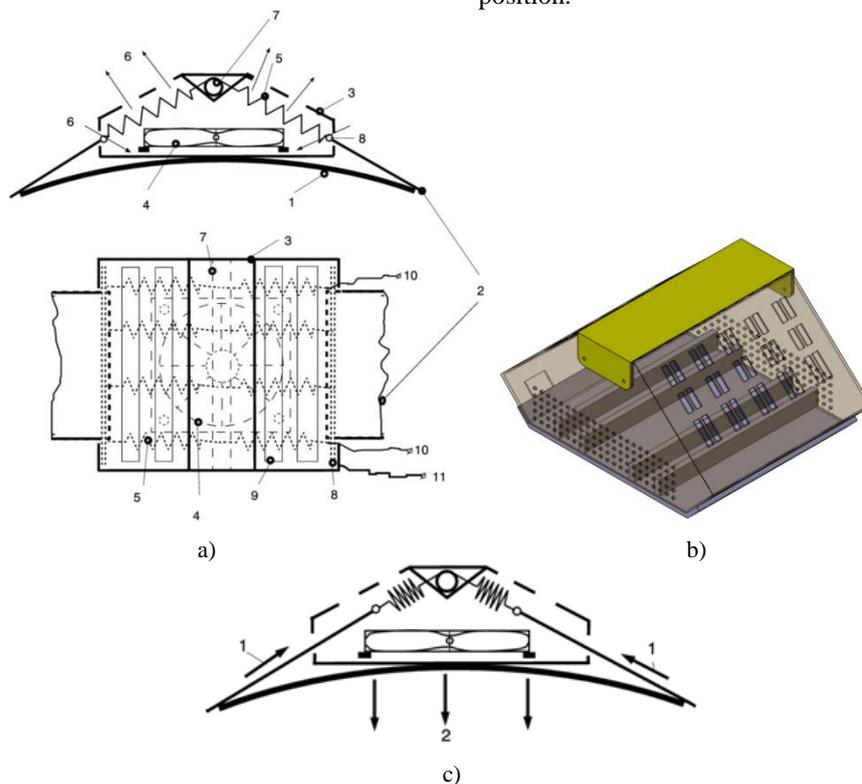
a) The compounds of the ventilation belt. 1-abdomen, 2-harnesses, 3-carcass, 4-ventilator, 5-NiTi spring, 6-flow of air to cool the springs, 7-insulated support to maintain the NiTi springs, 8-rod for connecting spring and harness, 9-slit for the cooling air, 10-power for ventilator, b) the 3D design of the plastic carcass of the apparatus proposed through 3D printing, the ventilation belt, c) the distribution of the mechanical tensions on the abdomen: 1: harnesses forces and 2 on the chest
